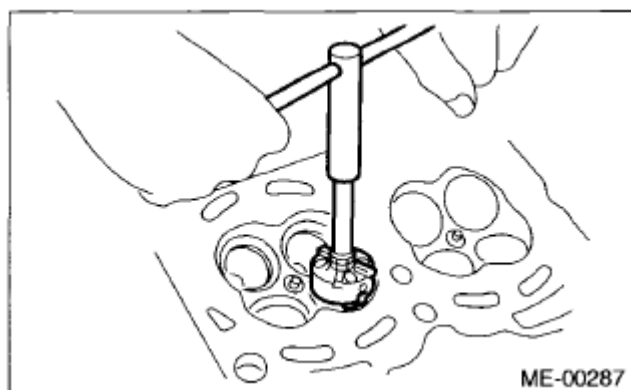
Inspecting Intake And Exhaust Valve Seats
